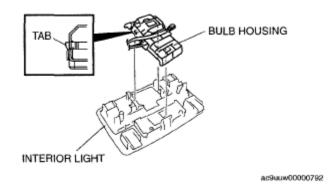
Identifying Interior Light & Bulb Housing Courtesy of MAZDA MOTORS CORP.
